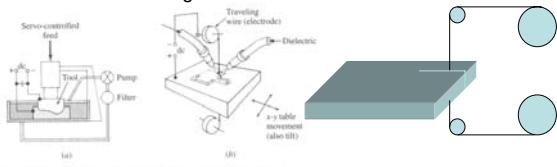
Electrodischarge machining is practiced with (a) form tools in non EDM and (b) traveling wire in wire EDM.
